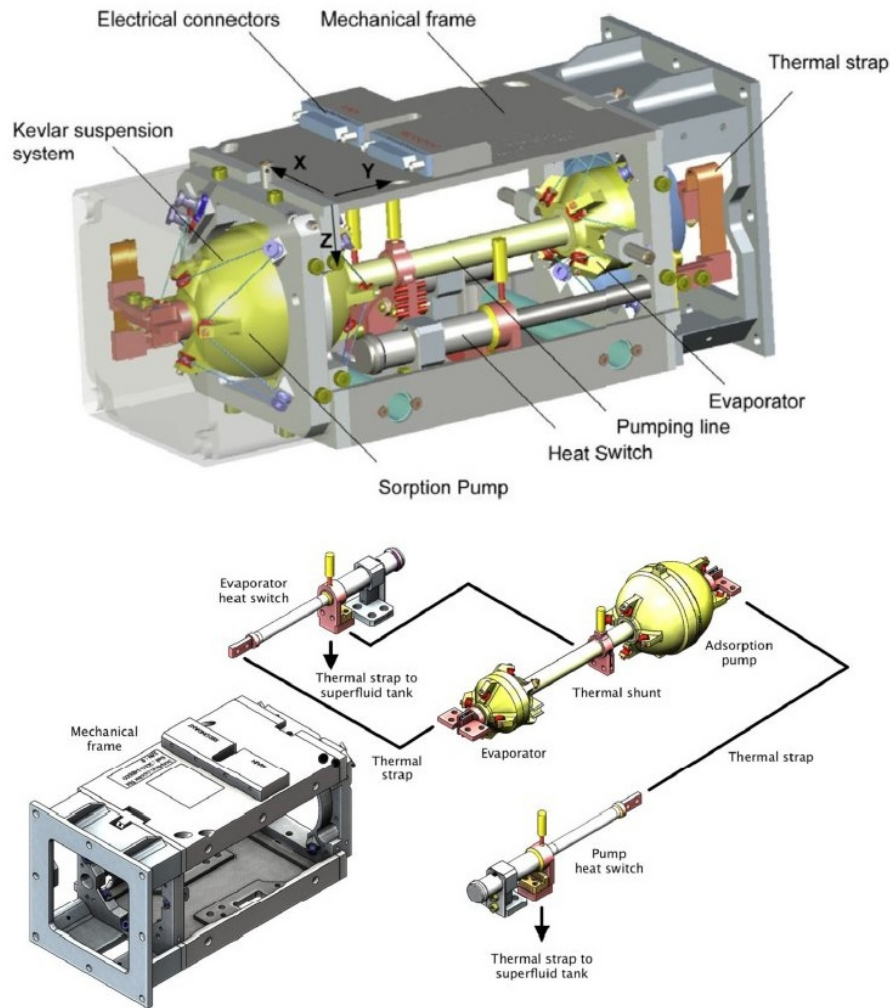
Overall 3D view of the PACS cooler identifying its main components. The bottom figure presents an exploded view identifying the elements represented schematically in Fig. 2.15.
